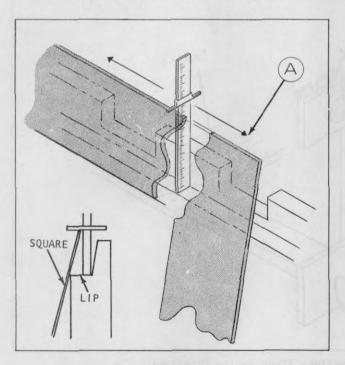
Squaring Carriage Rollers (Six Roller Carriage)
